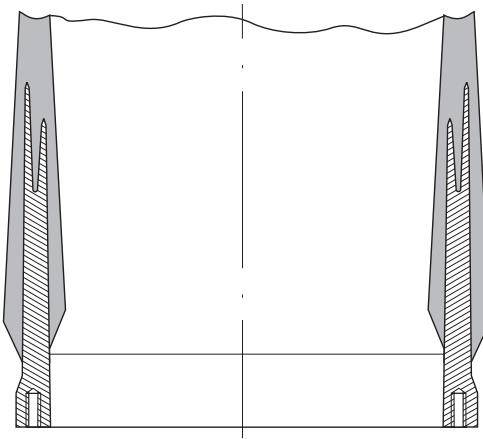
Bonded-in light aluminium flange of a rotor blade at the Vestas V39
